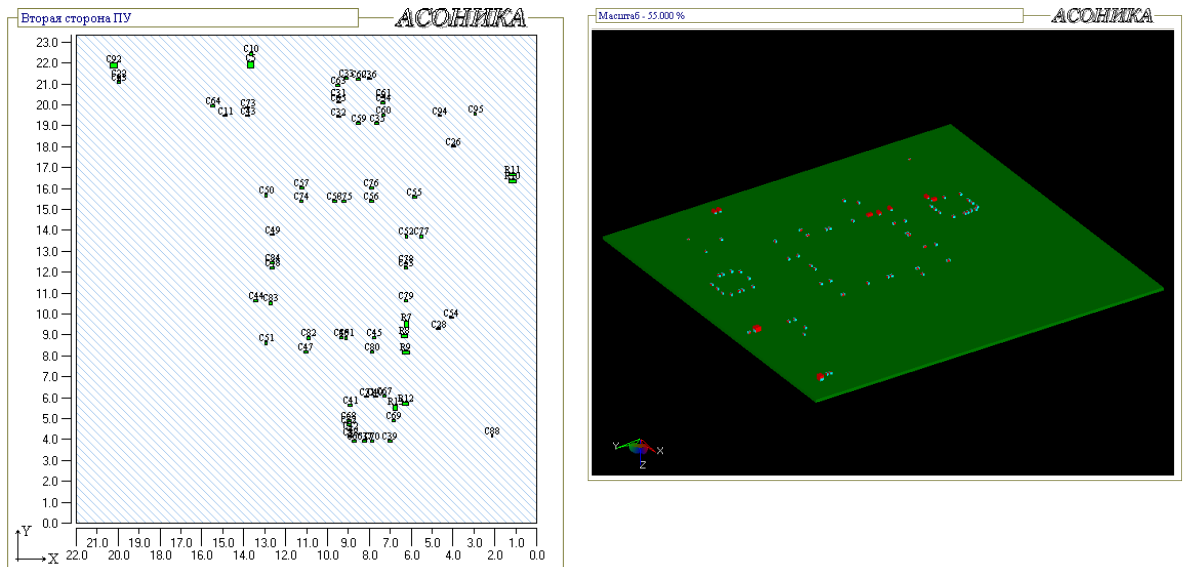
Design of printed assembly in the subsystem ASONIKA-TM (Side 2)
